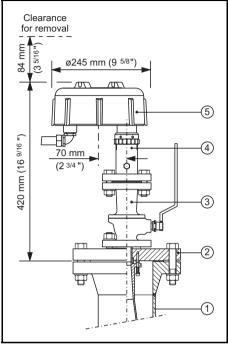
Dimensions of SmartRadar installed in 4" SCH40 stilling well
